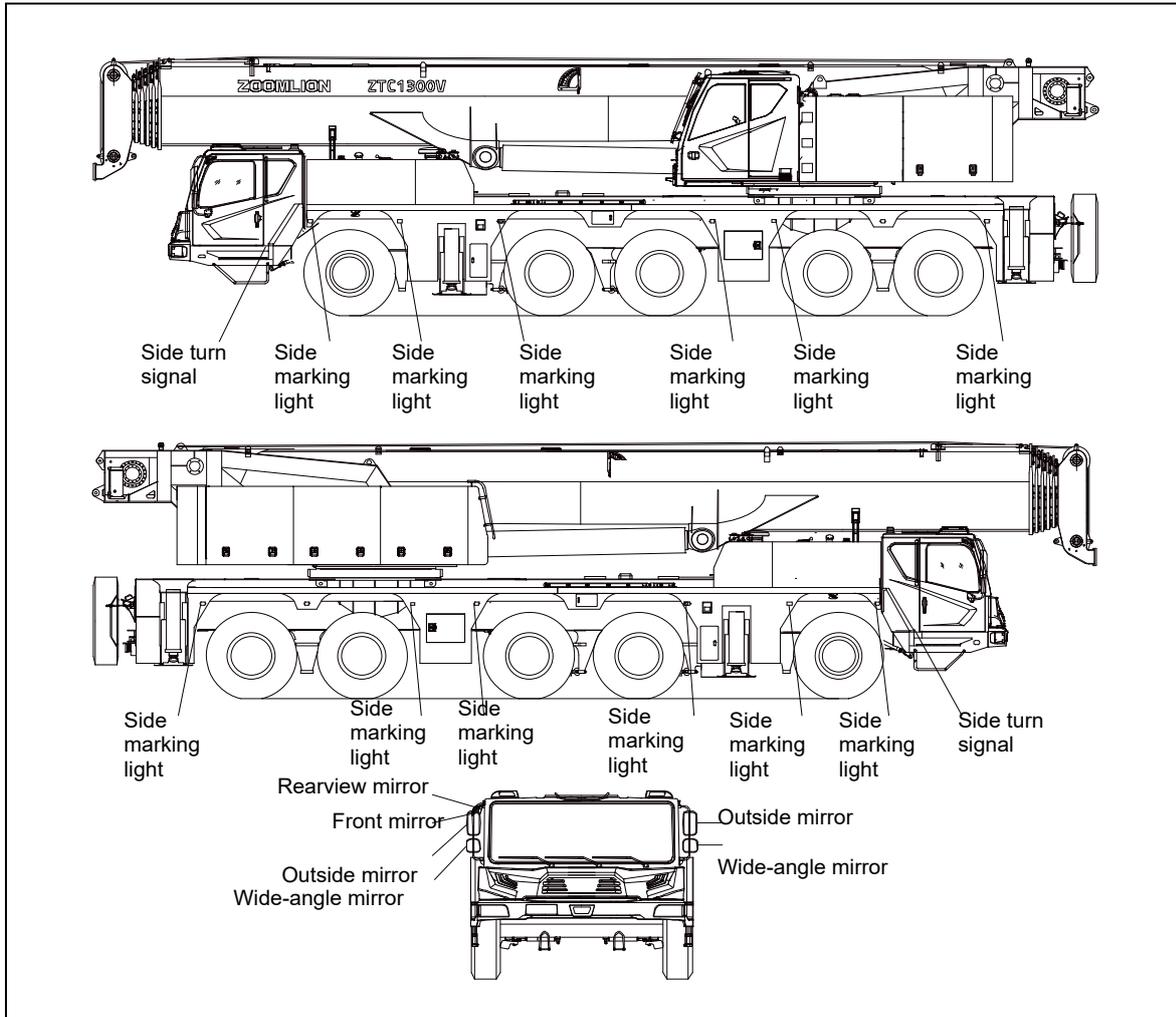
Parts excluded in the overall dimensions according to GB1589 and their positions
